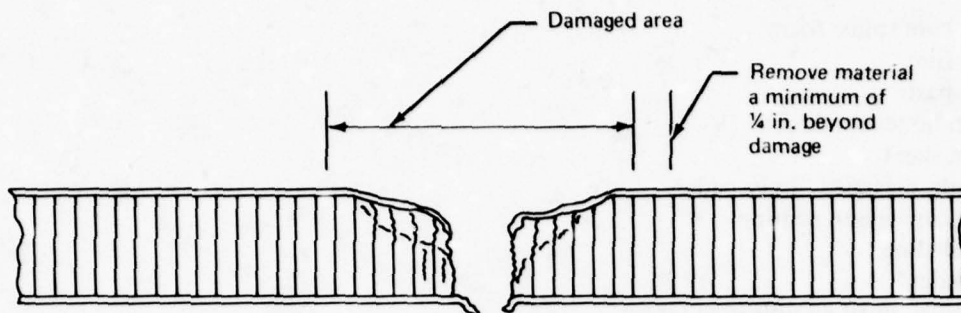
Damage Through Both Skins and Honeycomb Core
